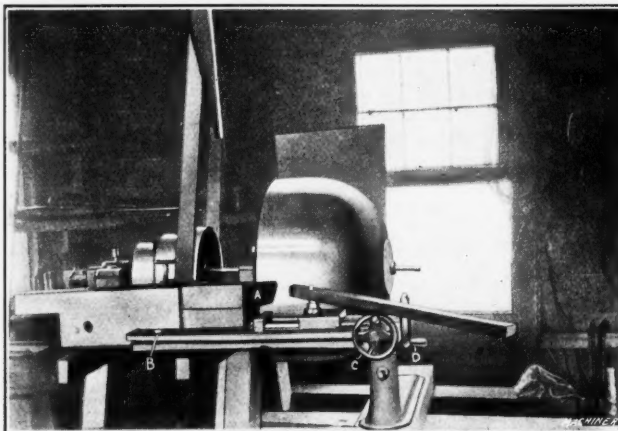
Spinning Lathe with Metal Chuck on Spindle ready for Forming a Shell
